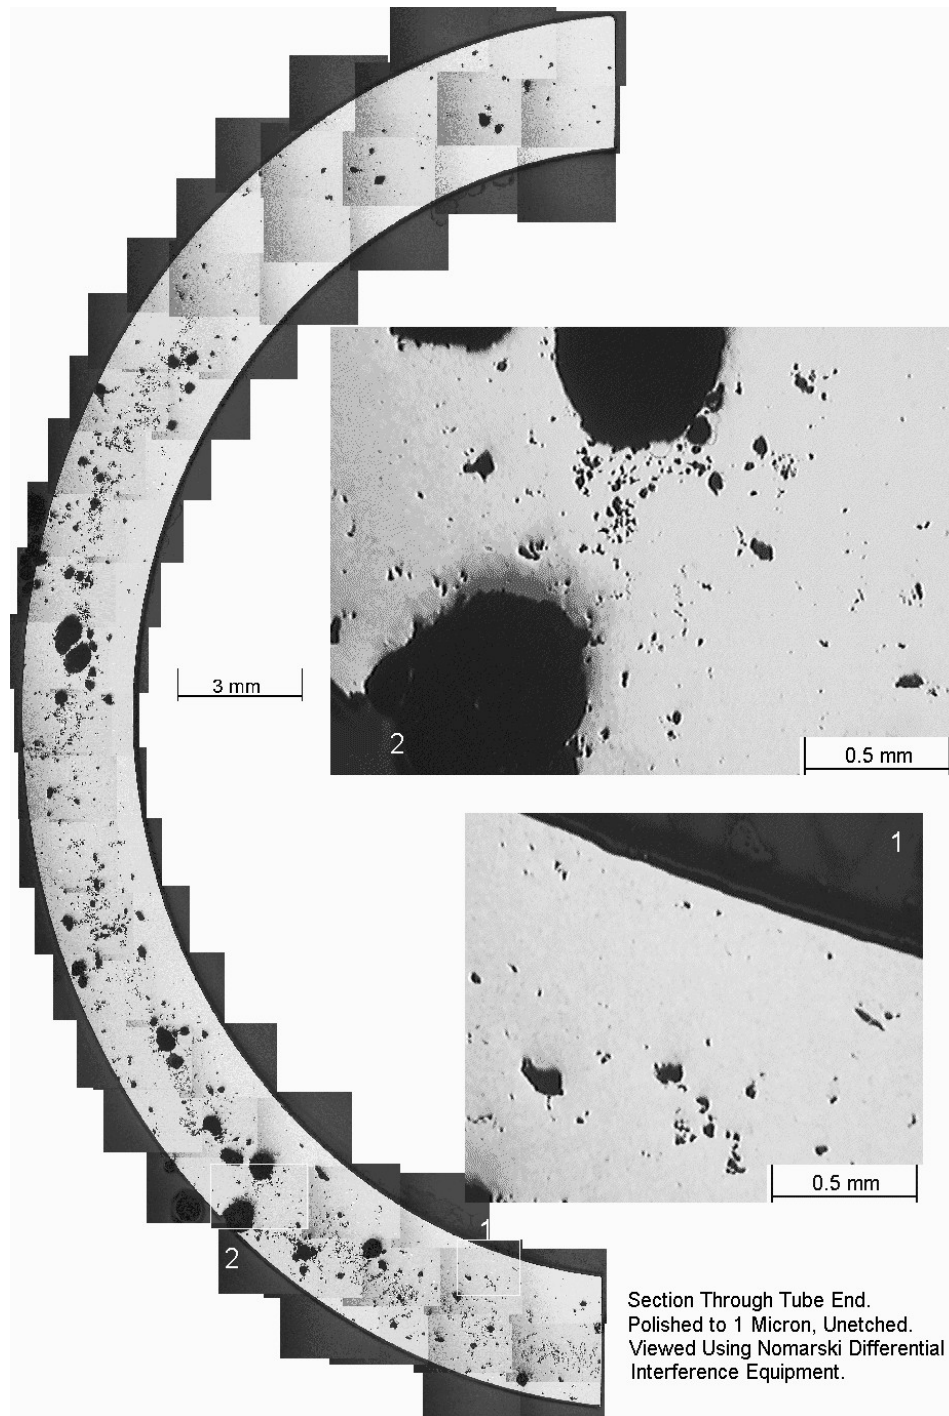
Extensive Gas Porosity Found Through Section of Tube End.²
